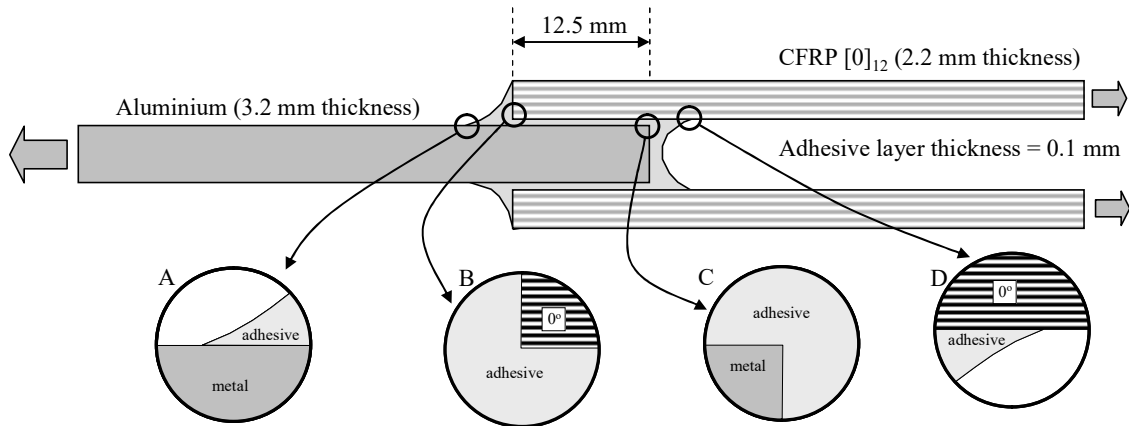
Geometry of the AL-CFRP double-lap joint.
